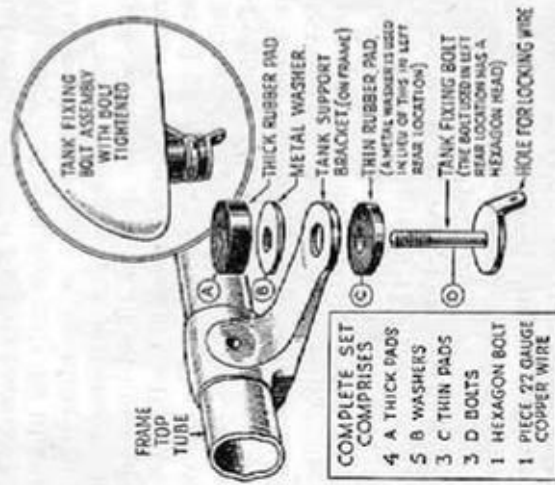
FUEL TANK FIXING BOLT ARRANGEMENT (1945-8)
